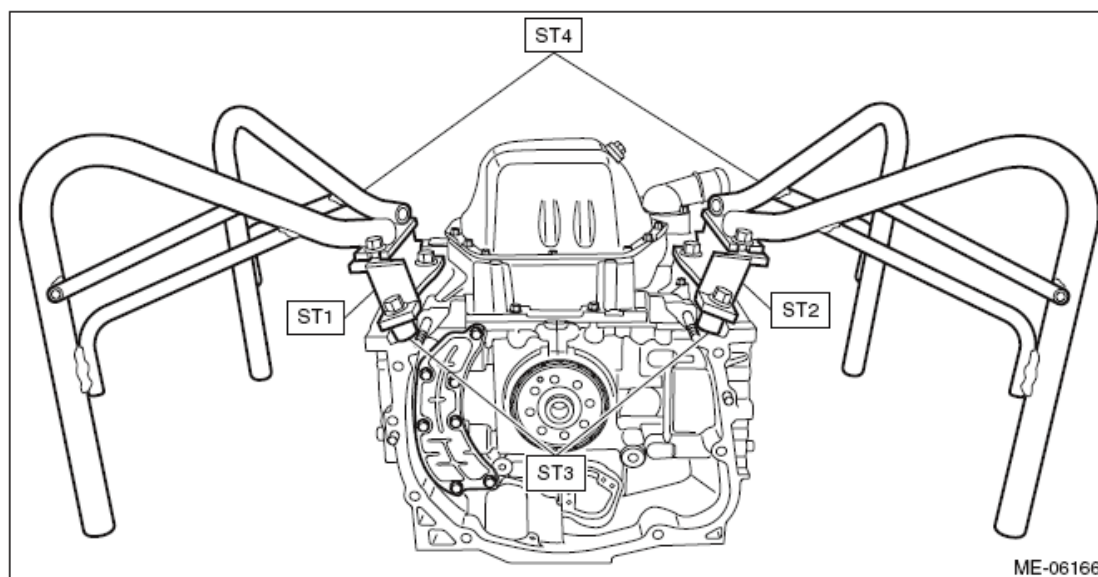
Removing Engine Stand Adapter From Cylinder Block
